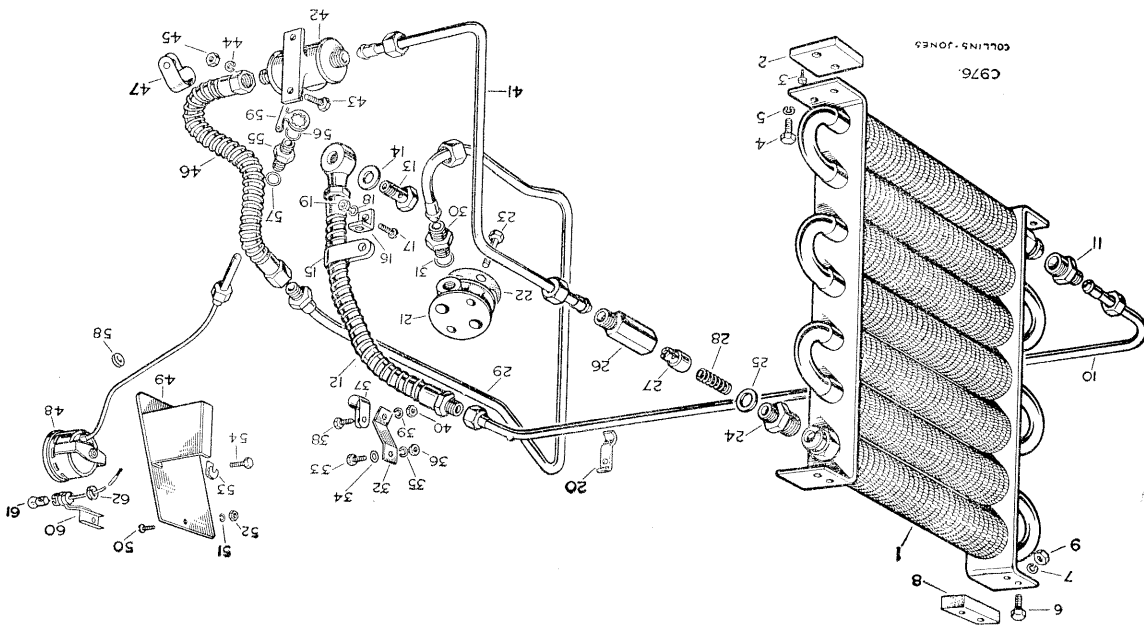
Layout of oil cooler—2 1/2 litre Petrol, Diesel models
